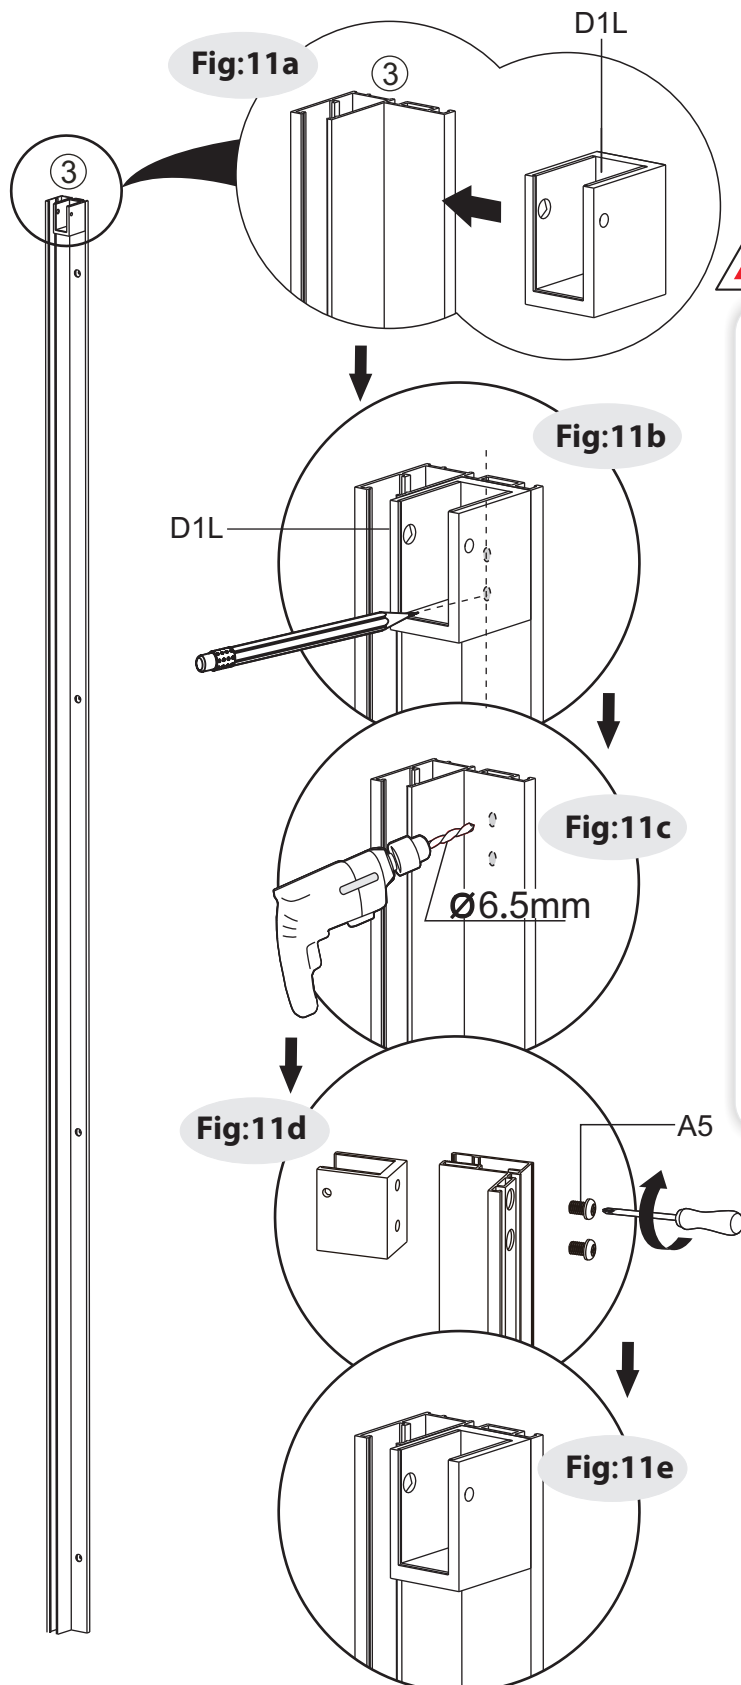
Position the wall fastener (D1L) on top of wall profile.
